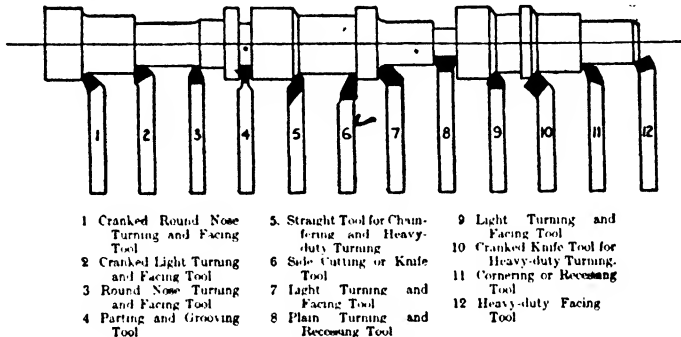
REPRESENTATIVE TYPES OF CUTTING TOOLS
